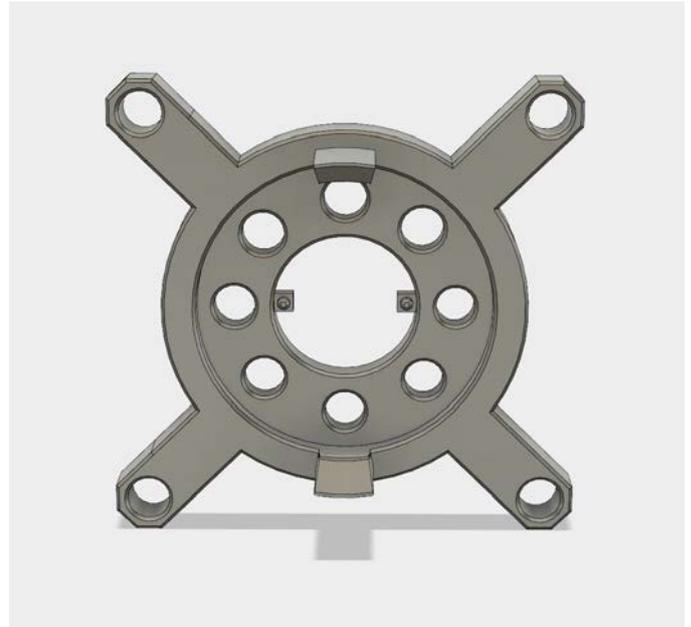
One iteration of the clamp design, which would adjoin the heatsink to the LED chip.
